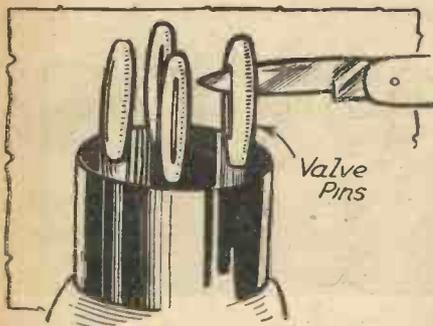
The old type valve legs should be opened to ensure a tight fit in the socket.
